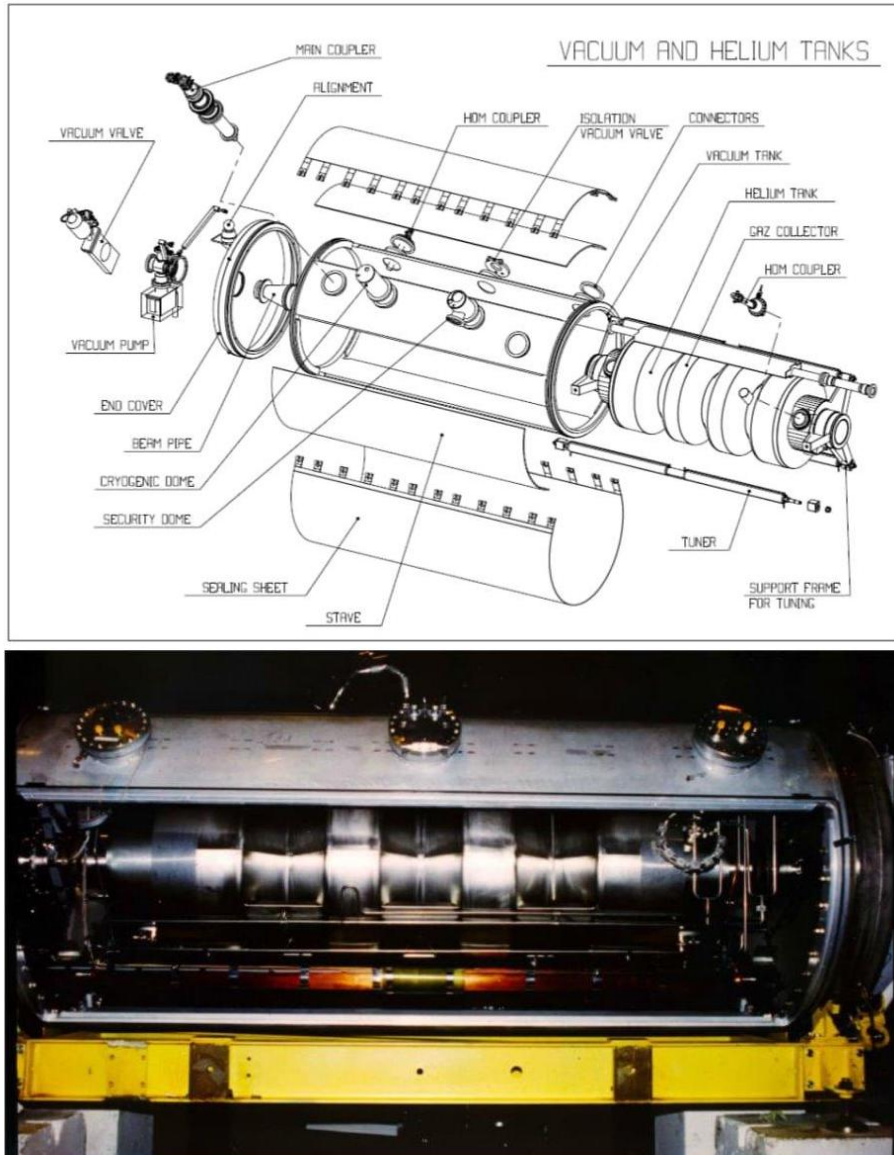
The integration of the cavity into the cryostat. Top: exploded view. Bottom: photo (images courtesy of CERN).
